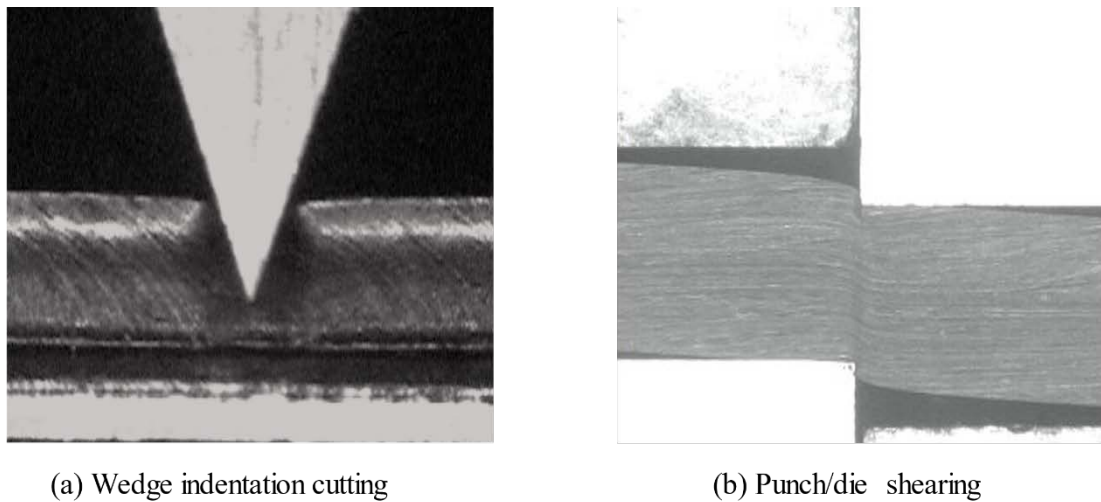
Die-cutting processes for packaging and protective sheet industries
